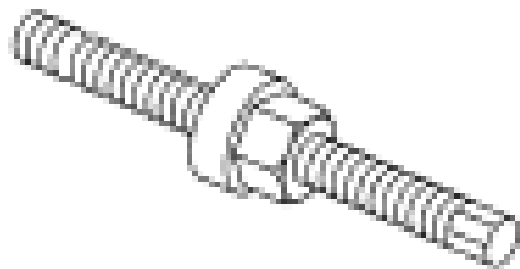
Identifying Special Tools (303-300 And 303-350)
